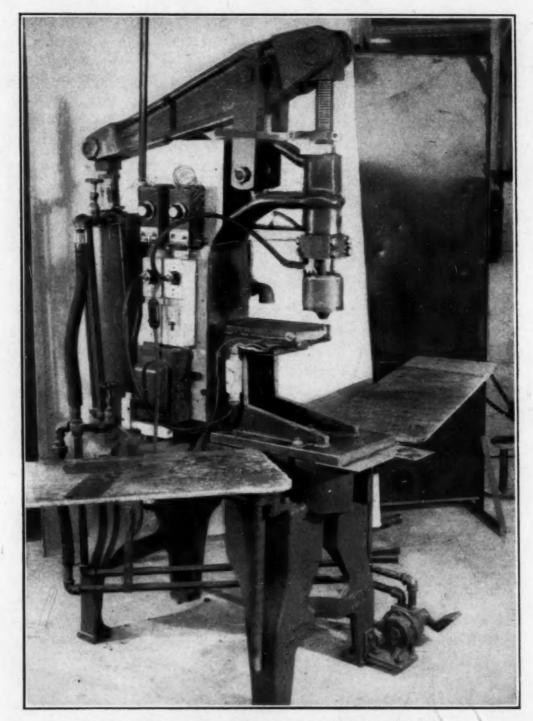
Press Fitted for Hot Dimpling Magnesium Alloy Sheet.
